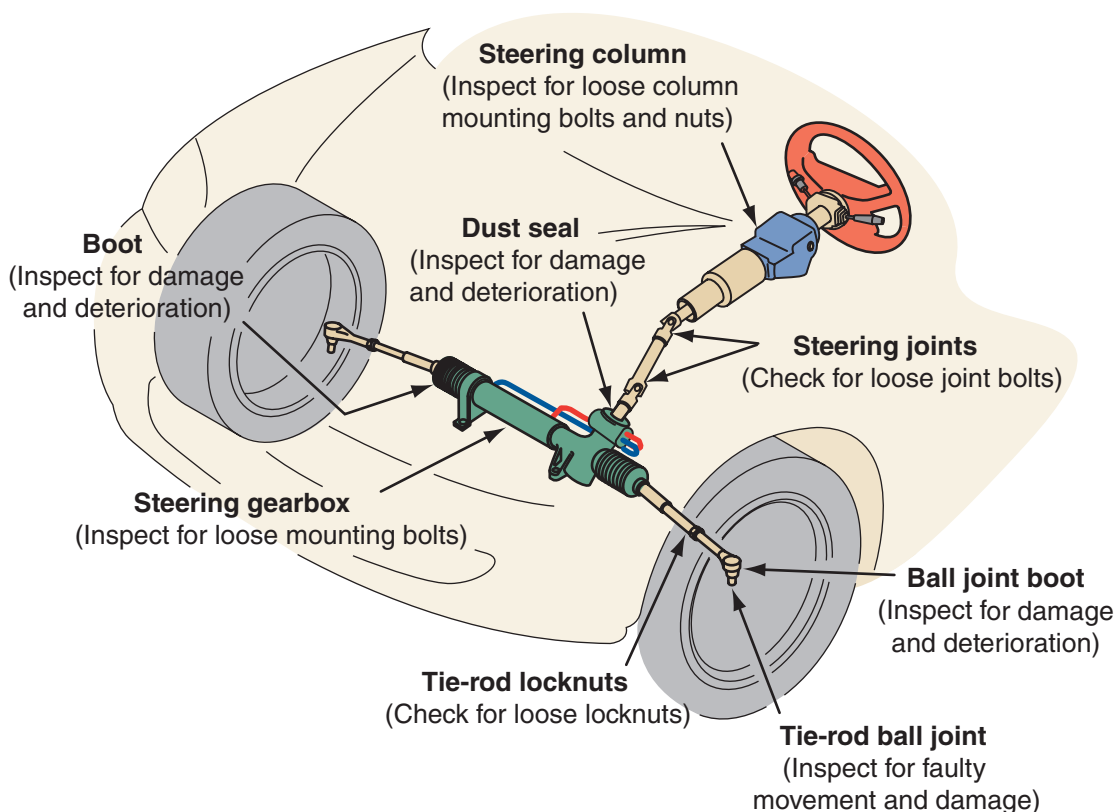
All steering parts should be carefully checked during diagnosis.
